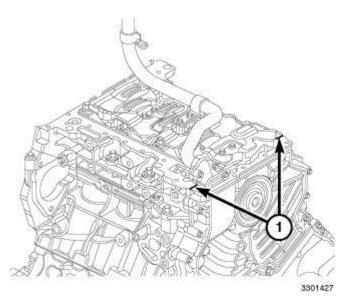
RTV Sealant To Timing Cover To Engine Block T-Joints Courtesy of CHRYSLER GROUP, LLC
